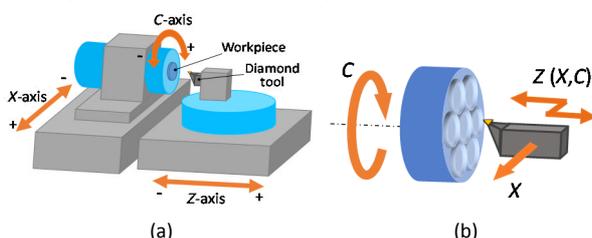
Schematic of STS diamond turning (a) diamond turning lathe, and (b) machining process
